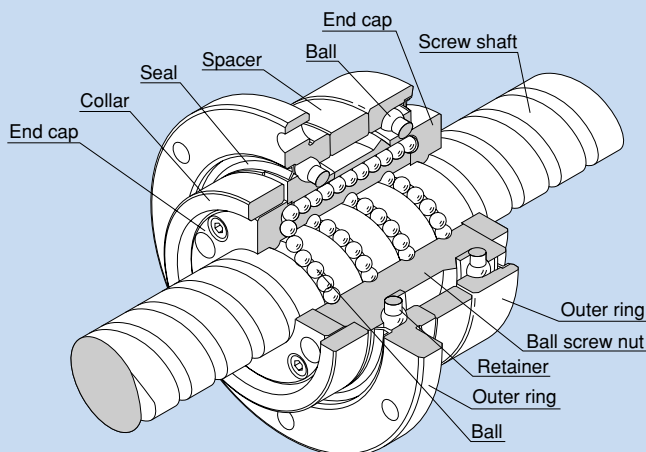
Structure of Large-Lead Rotary Nut Ball Screw Model BLR
